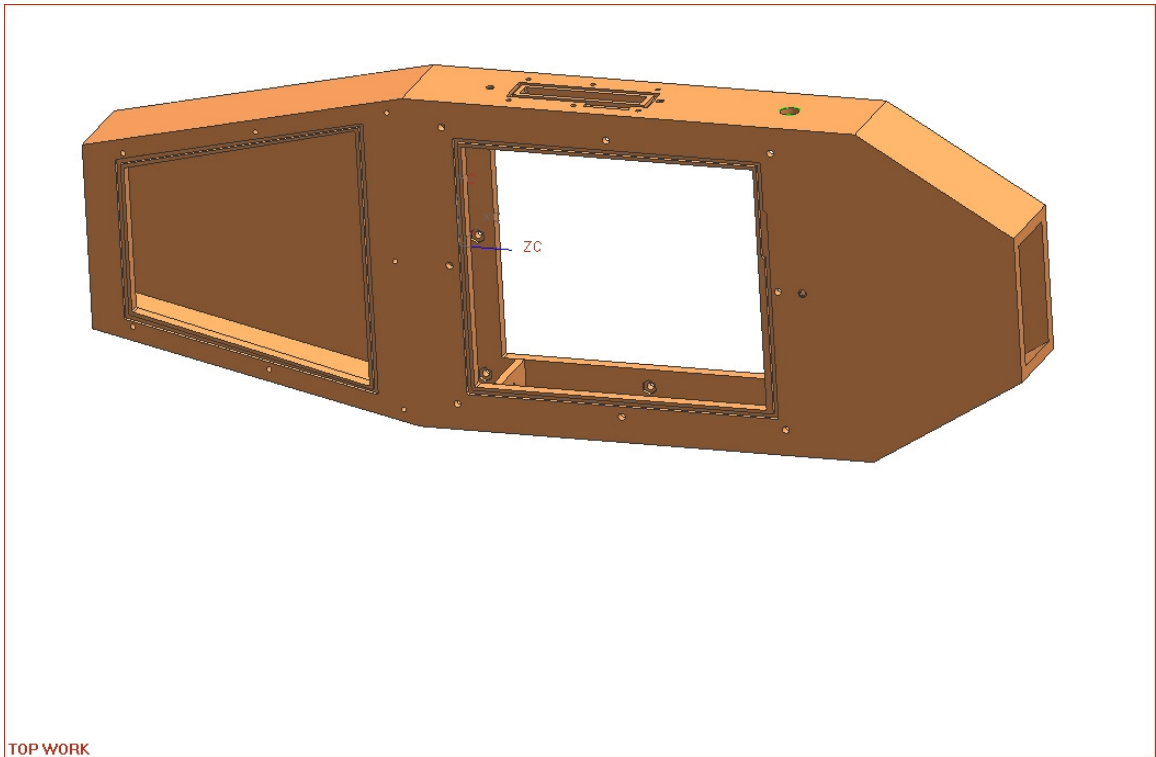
Pictoral View of the Sector Combustor Welded together
